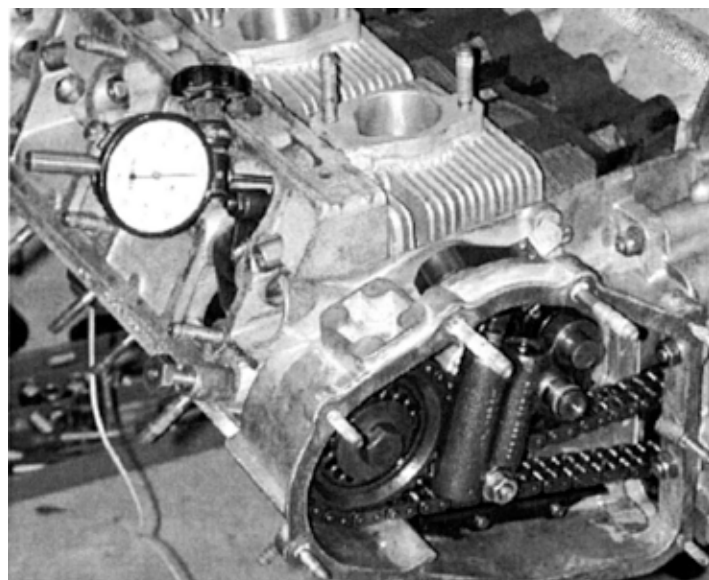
Dial Gauge in place on the cover stud, with the gauge pin resting on the valve spring retainer. Preload the gauge by about 10mm.
